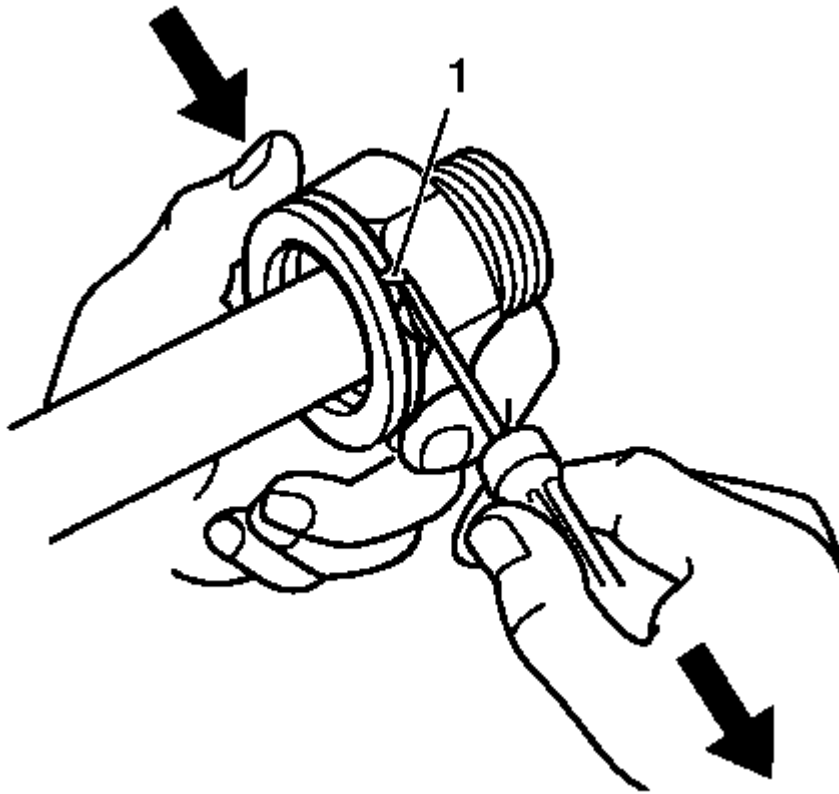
Automatic Transmission Oil Cooler Fitting Retaining Ring
